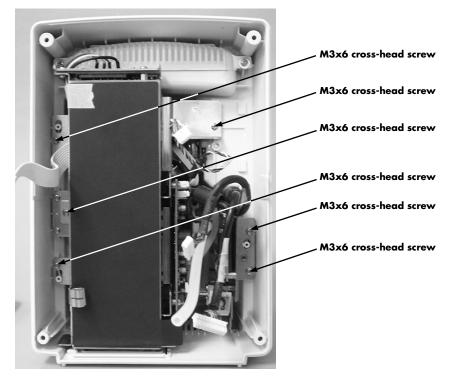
Remove six (6) M3x6 cross-head screws.
